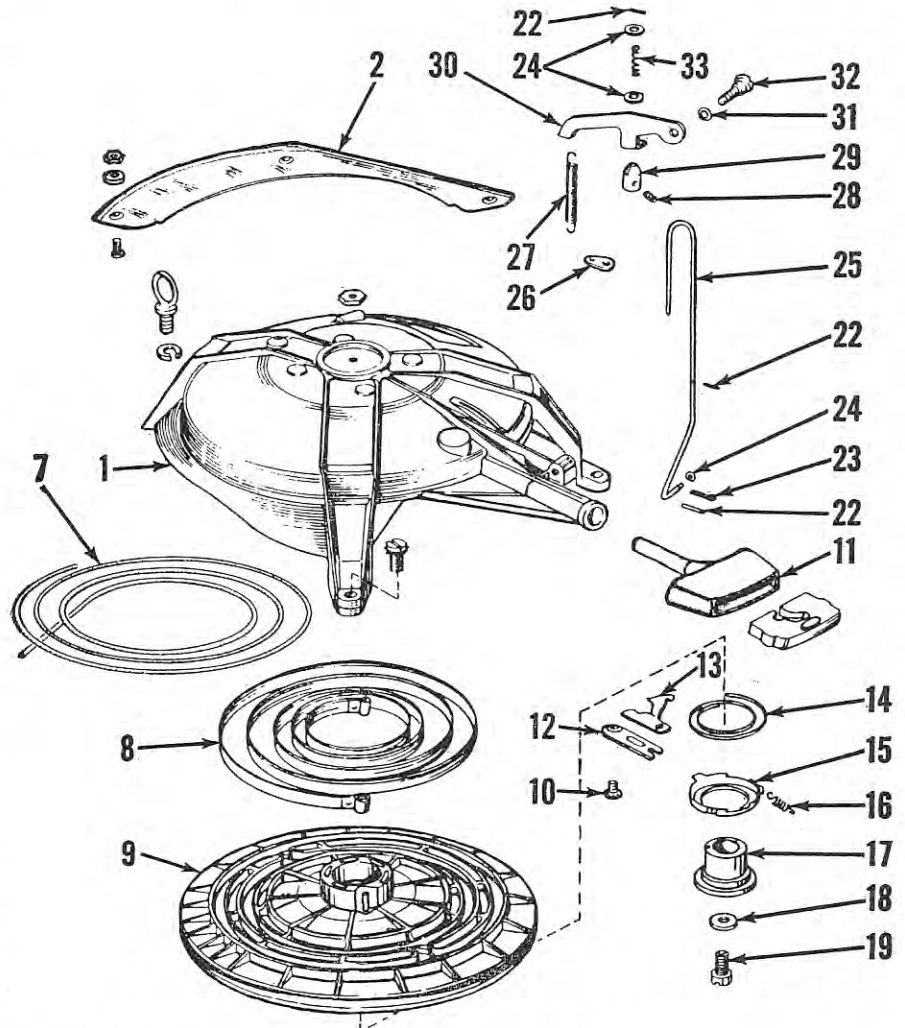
Exploded view of starter of the type used on late 25 horsepower models. Early models are similar.
